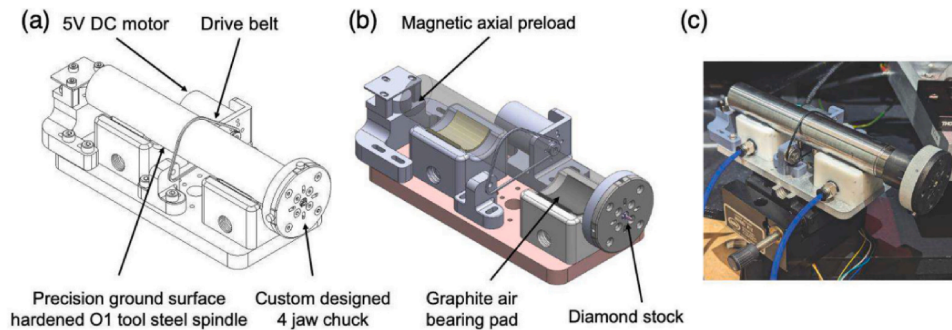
Second-generation outer-diameter air-bearing stage. The workpiece-defined rotational axis reduces transferred spindle runout during OD shaping. Custom-built high-precision air bearing lathe used for machining the OD of the diamond rotors. (a) A wire frame diagram showing the overall assembly, highlighting the DC drive motor, drive belt, precision ground spindle, and the custom 4-jaw chuck. (b) A sectional 3D CAD view reveals internal components, including the graphite air bearing pads that provide low-friction, high-precision rotation, the magnetic axial preload mechanism, and the positioning of the diamond stock within the chuck. (c) A photograph shows the physical assembled lathe. Adapted from Schaffer et al. [2].
